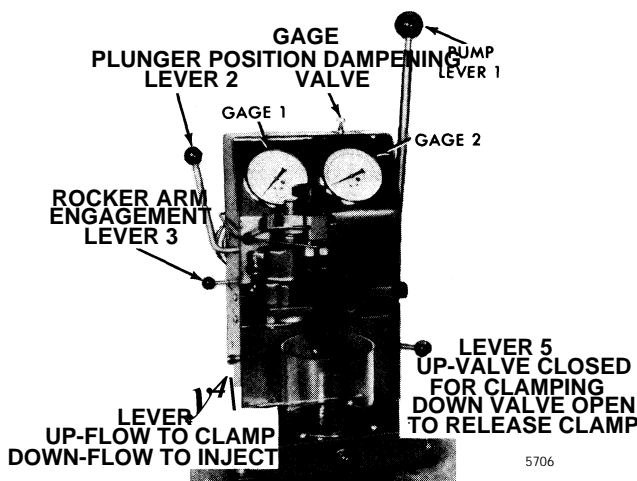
Injector in Position for Testing with Tester J 23010-A
